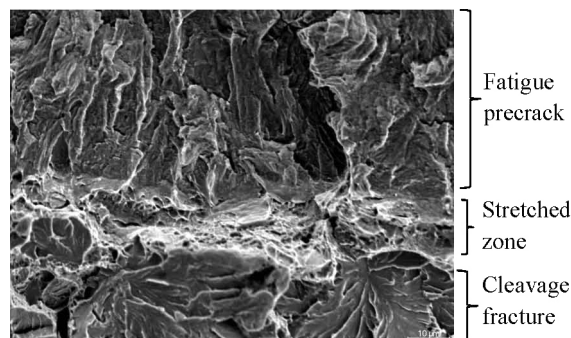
SEM micrograph showing the fracture surface fractographic features of the fracture toughness specimens.
